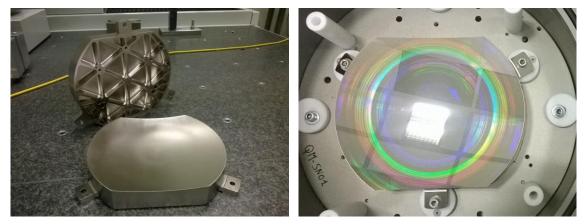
Two HRM mirror blanks after NiP coating (left) and one in the transportation container after final diamond machining (right).
